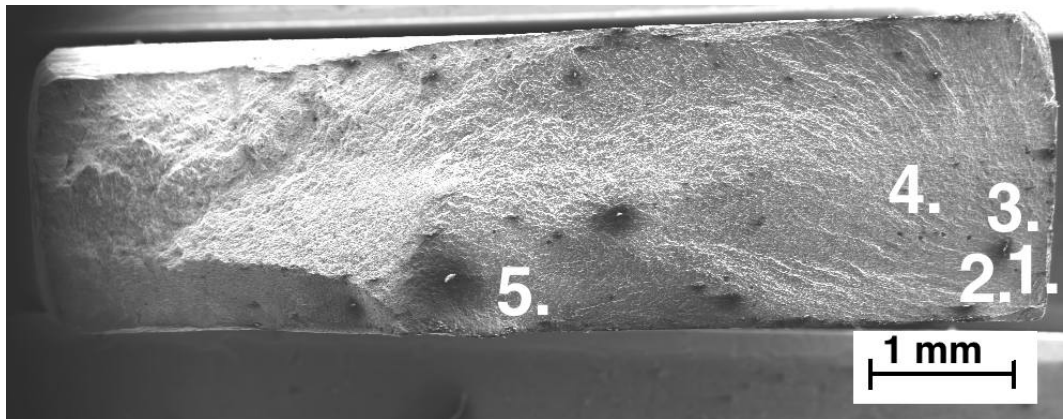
Overview of the fracture surface AA6082.50-T6 PWHT with most cycles to fracture. The numbers represent the different areas investigated further below.
